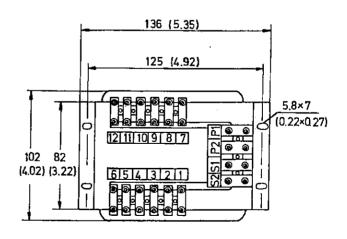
Dimensions in mm (inch) for Auxiliary Current Transformer type SLCE 12.
